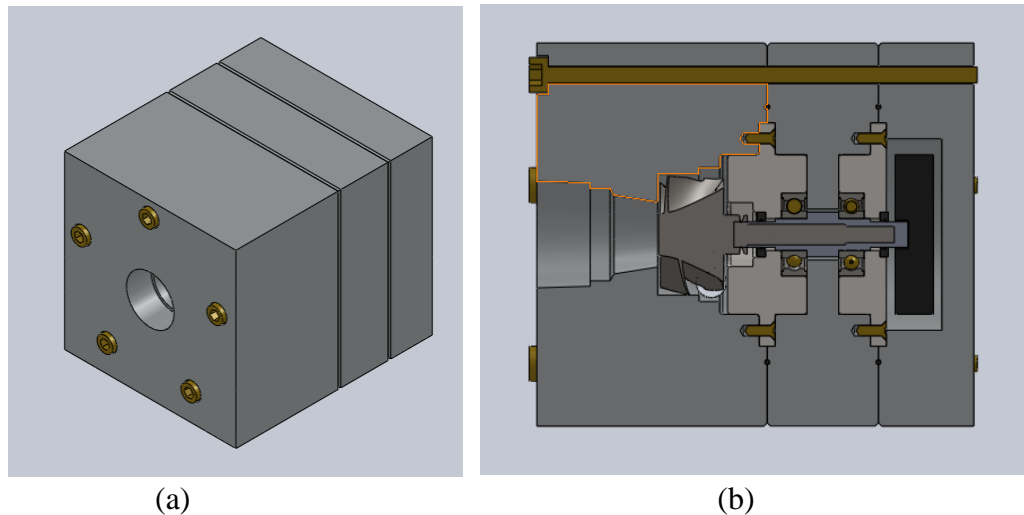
Isometric view and cross-sectional view of proposed design of ORC turbine
